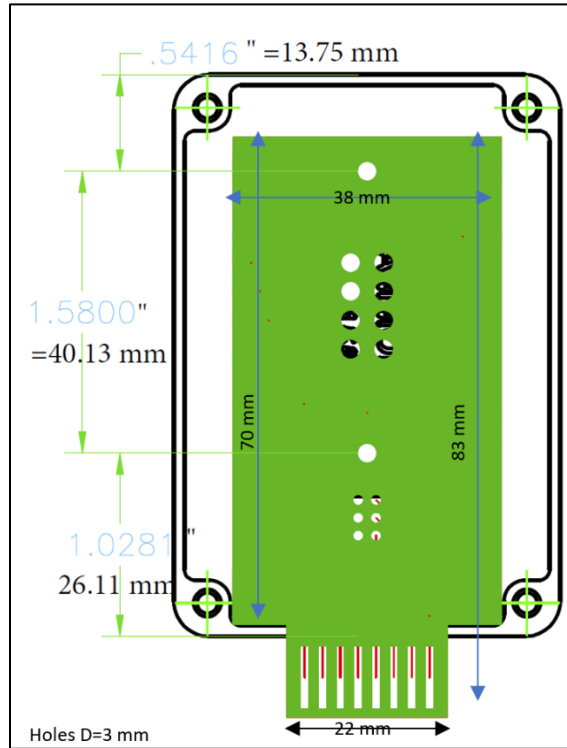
(u) Design for standoff to mount sensor PCB in the box
